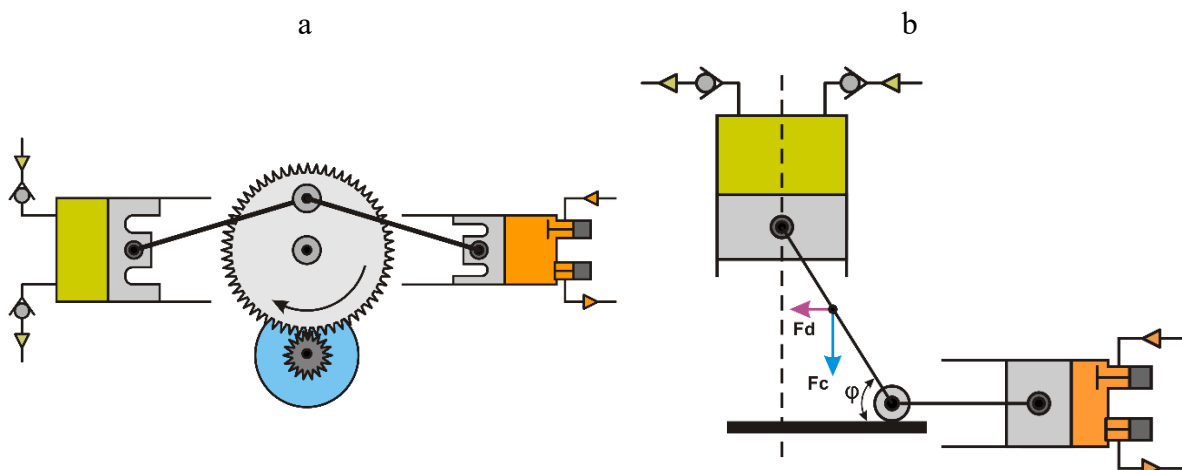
Schemes of vapor driven compressor with mechanical linkages between the pistons.
